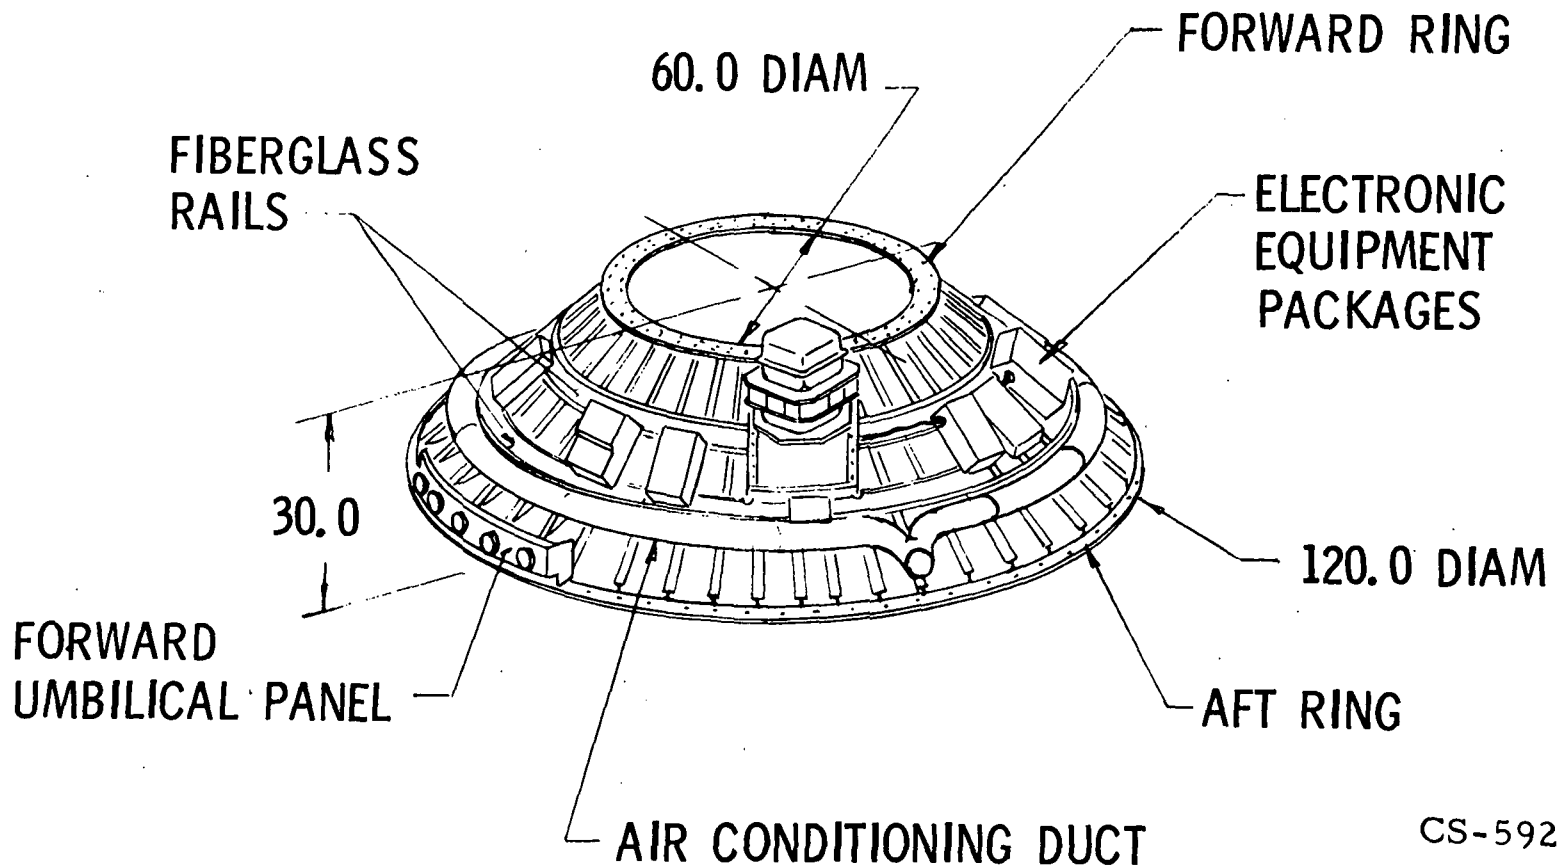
CENTAUR TRUSS ADAPTER
